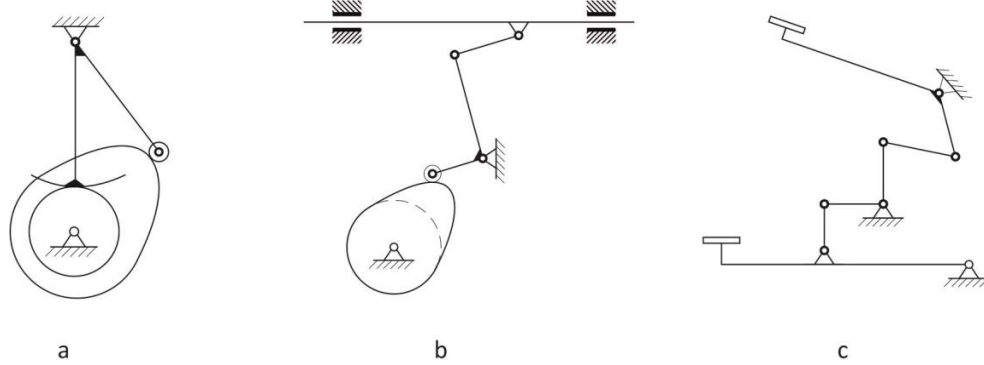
Multiple mechanisms with several degrees of freedom a) cam mechanism with lever, b) a mechanism packing machine, c) a lever mechanism typewriter
